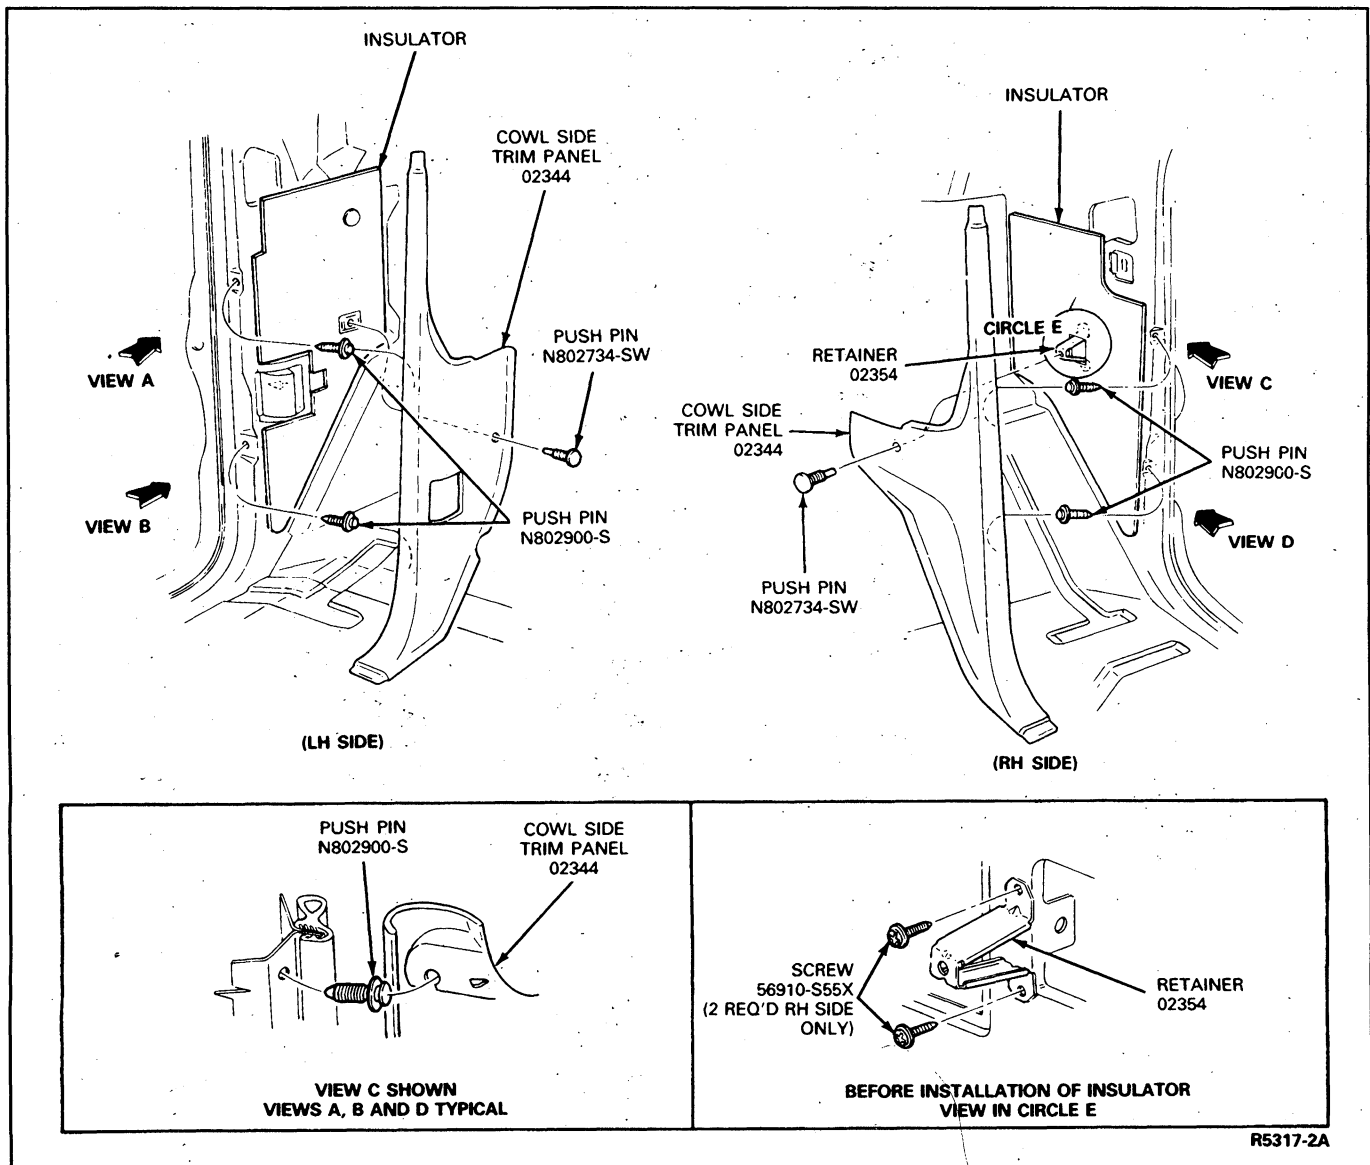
Cowl Side Trim Panels—F-150—F-350, F-Super Duty and Bronco
